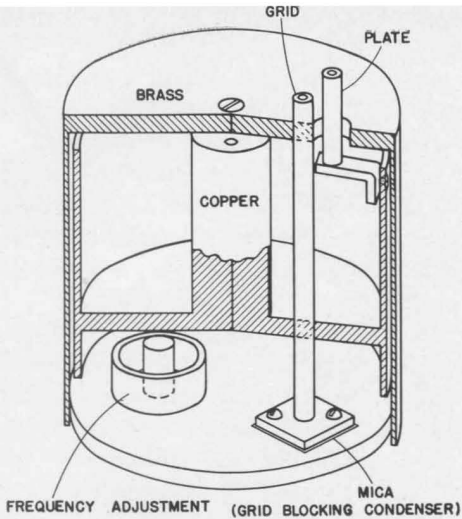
Sectional view of the tank circuit showing details of assembly
